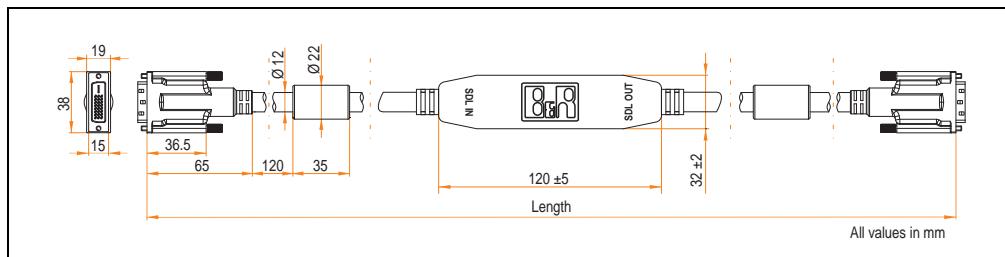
Dimensions - SDL flex cable with extender 5CSDL.0x00-13
